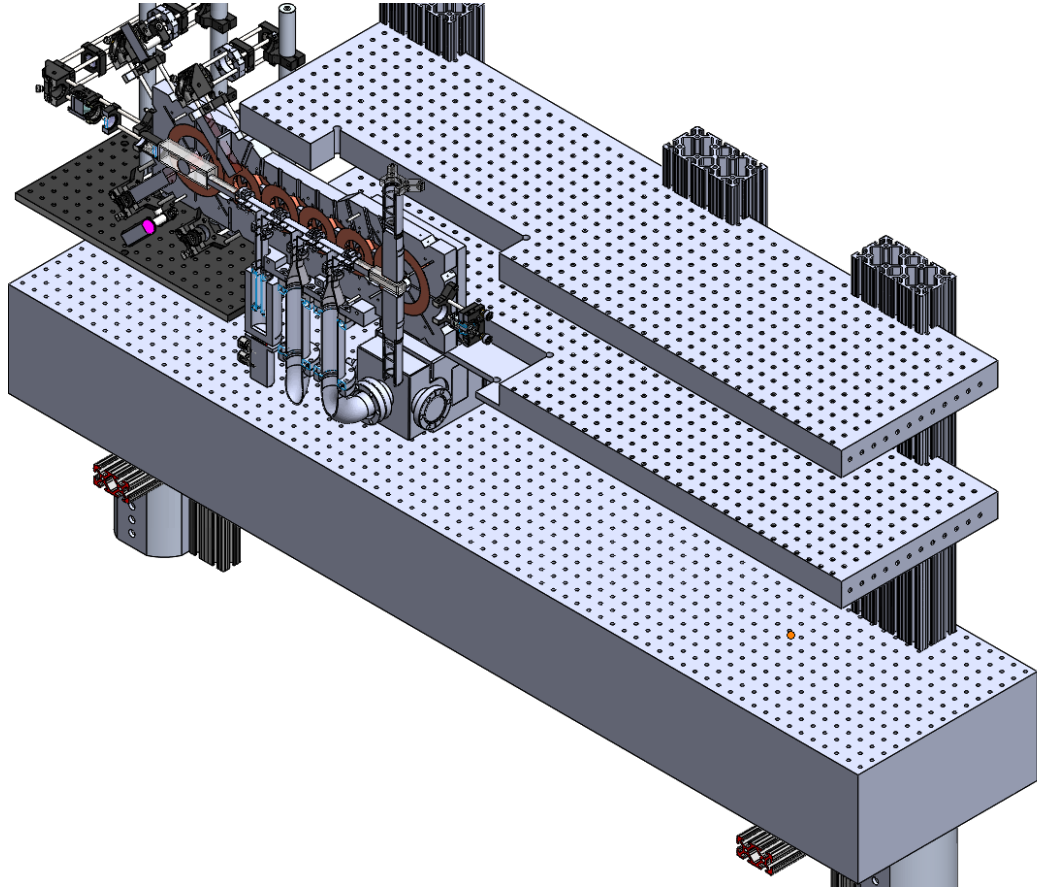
Three-level optical breadboard assembly in a section view (only half of the assembly is shown for clarity).
